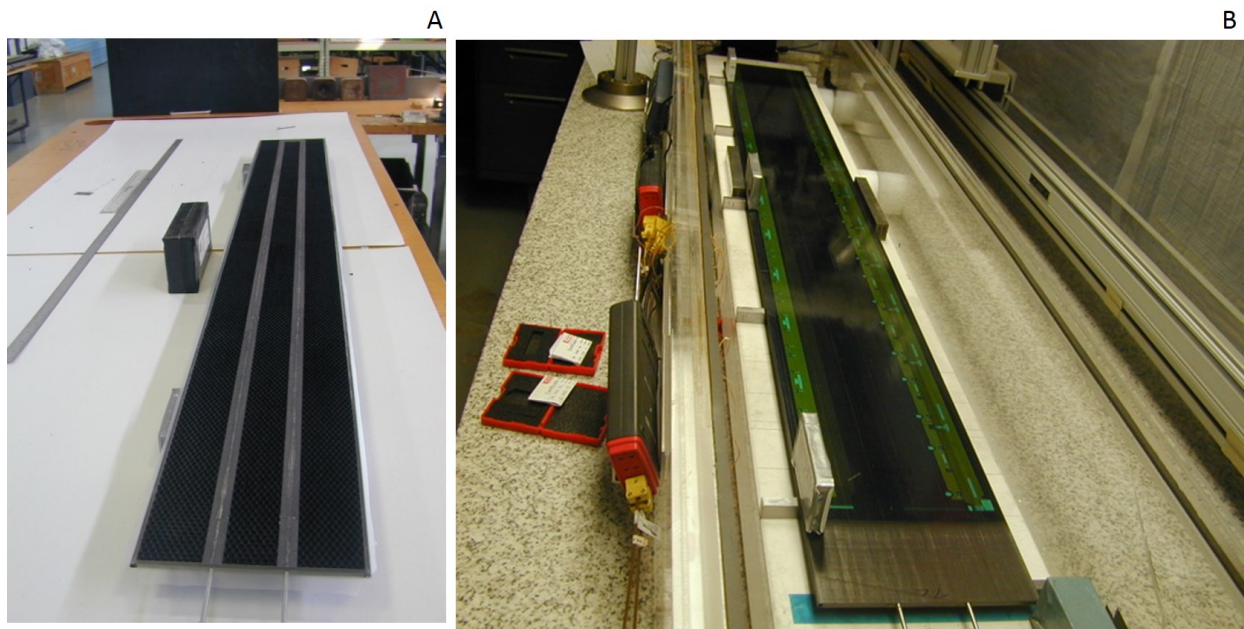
A) Unfinished staff showing honeycomb, carbon foam, and pipe core. B) Finished staff ready to be mounted with silicon sensors/modules.
